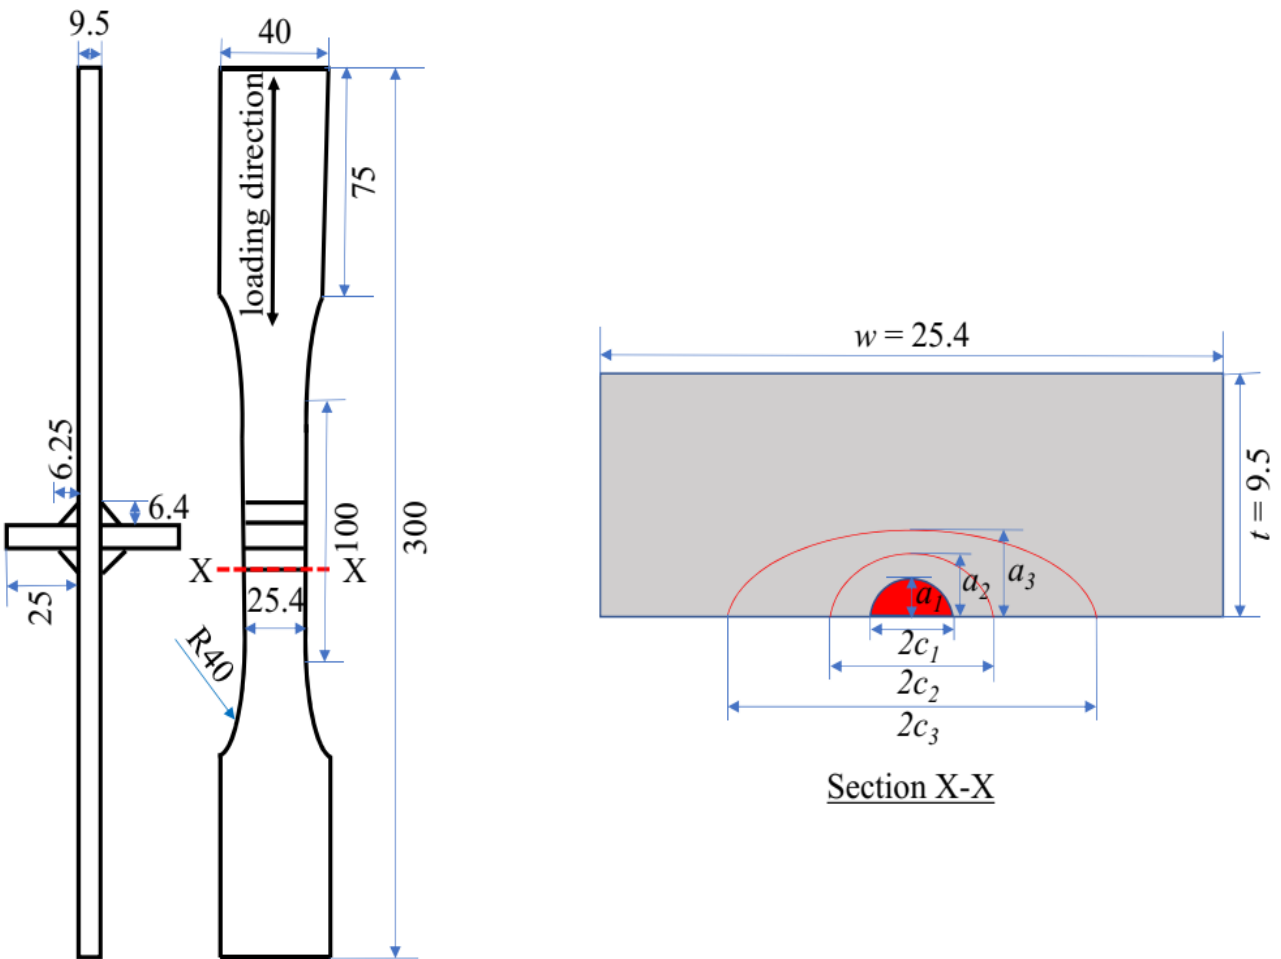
Component geometry (left) and cross-section with a typical semi-elliptical surface crack (right) (all dimensions in mm)
